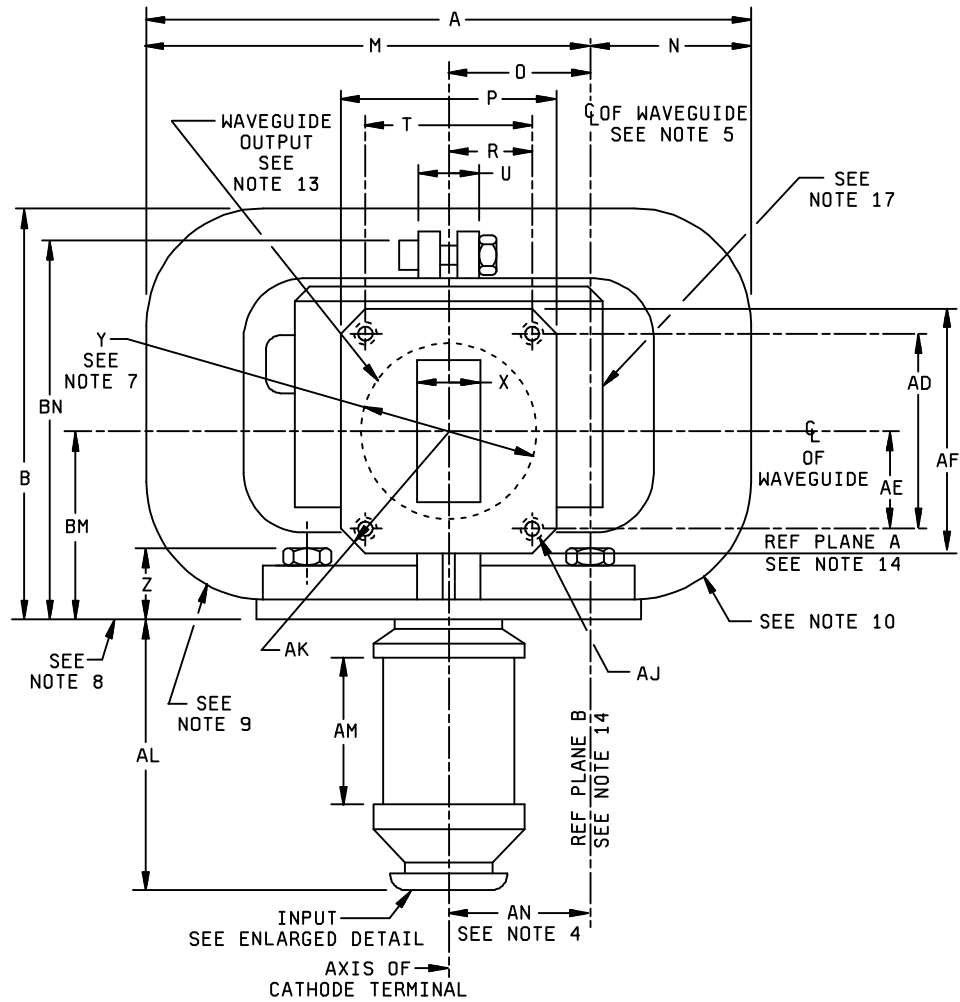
Outline drawing of electron tube type DOD-042 (front view).
